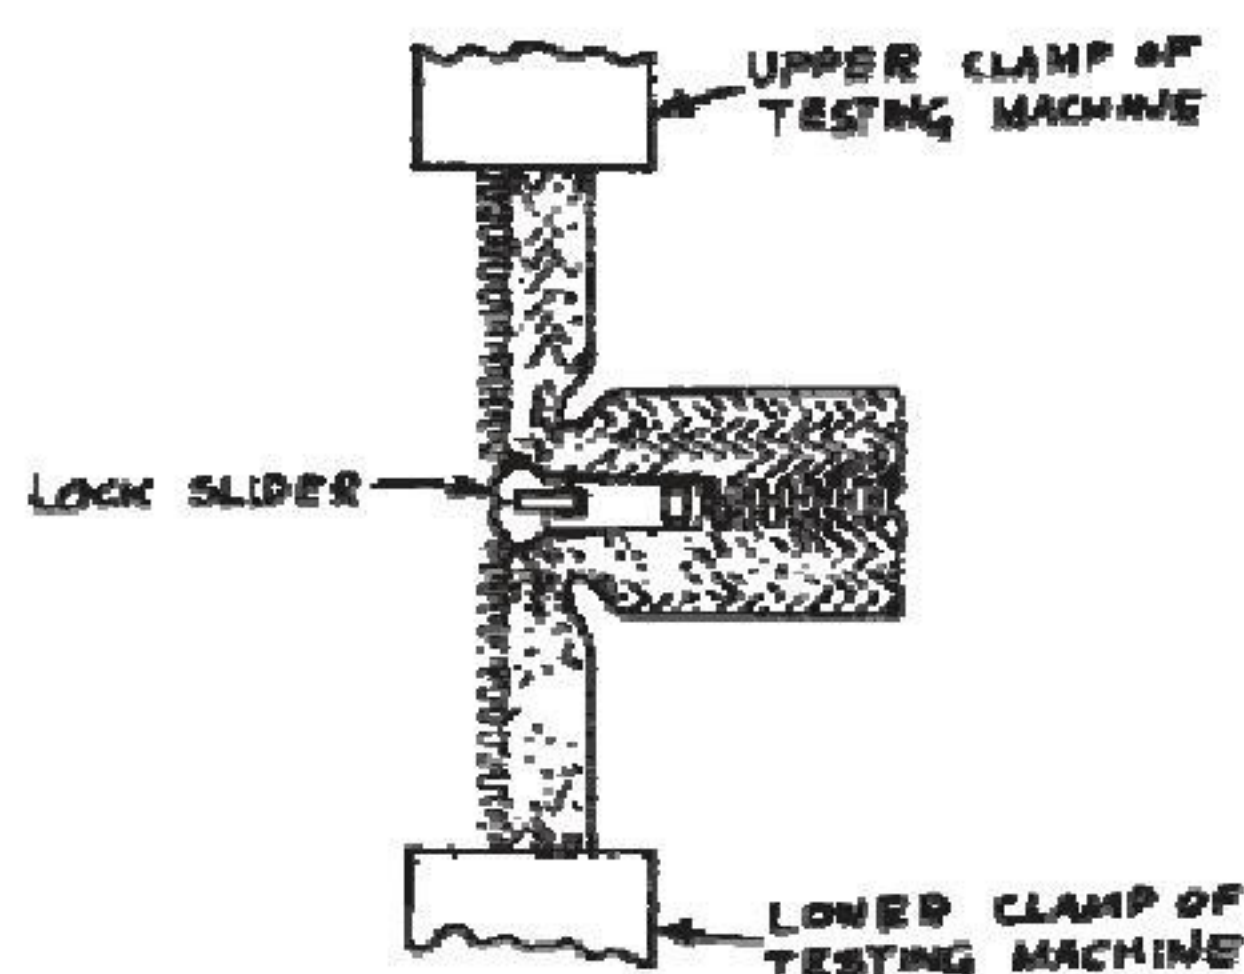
Slider Lock Holding, Stringer Separation Test
